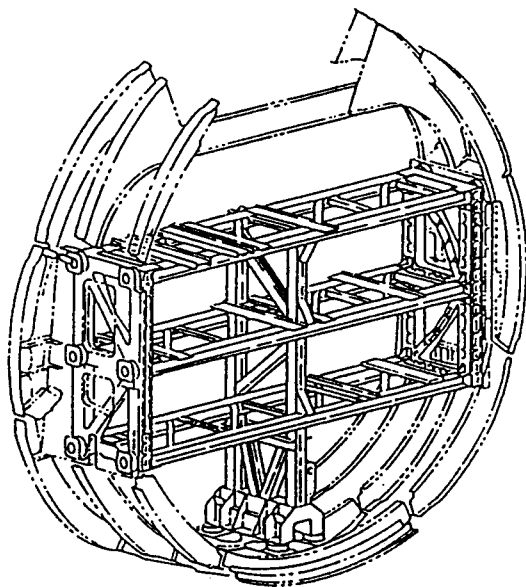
Sketch of Forward Equipment Rack Assembly.
